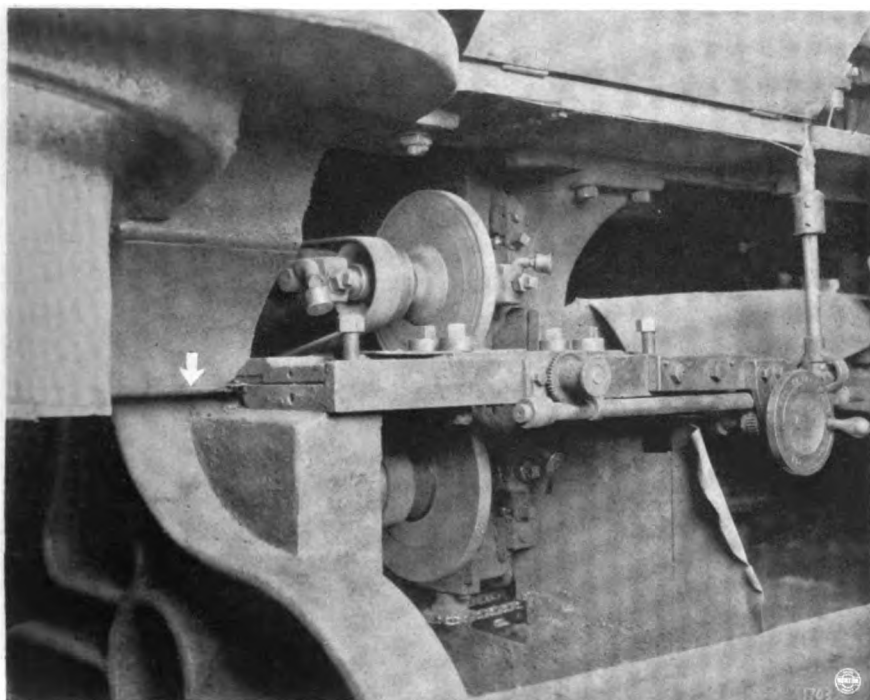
Method of Grinding Endless Knife on the Turner Splitting Machine
